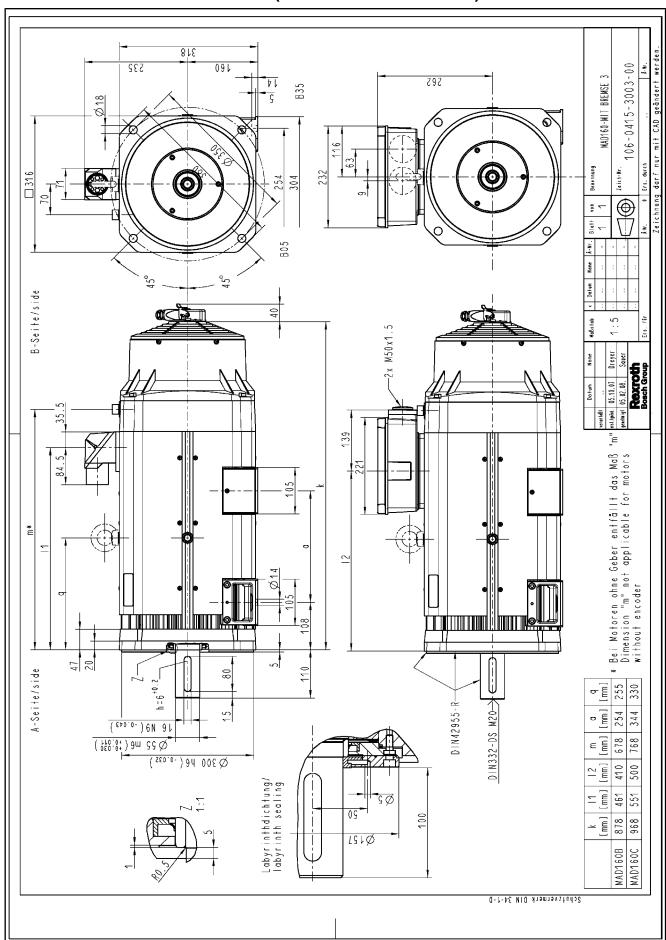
Dimension sheet MAD160 with brake 1/5
